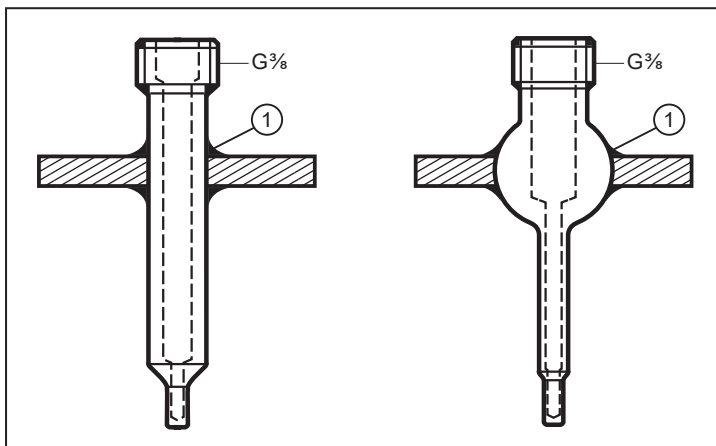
Installation according to EHEDG with welding thermowells
